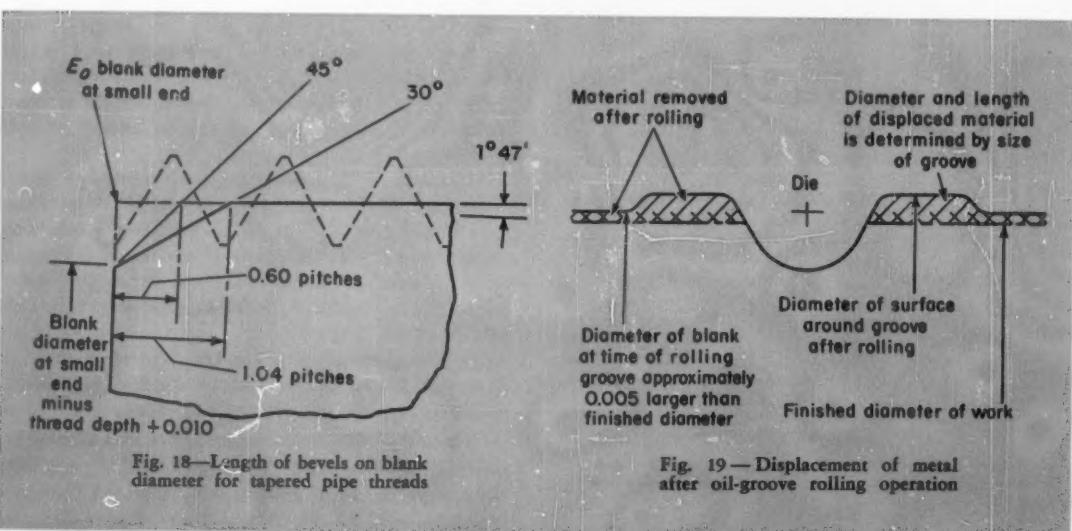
Length of bevels on blank diameter for tapered pipe threads
